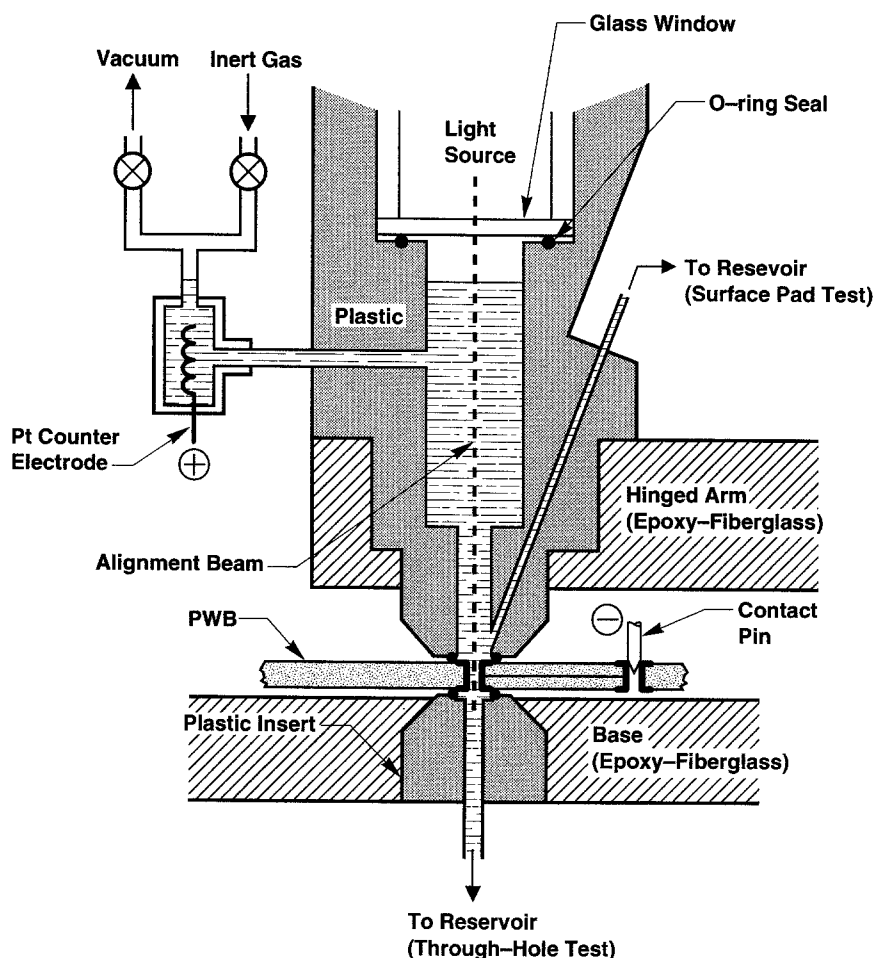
Apparatus for SERA testing of through-holes and surface pads on printed wiring boards.
